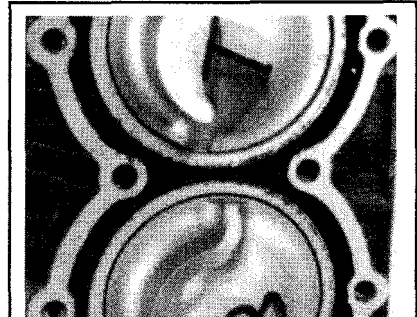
Before removal, label the tops of the pistons to identify the Top and Bottom (or No. 1 and No. 2 pistons)
